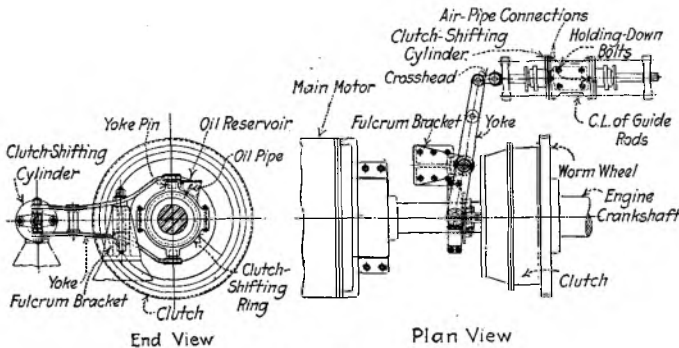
GENERAL ARRANGEMENT OF CLUTCH
